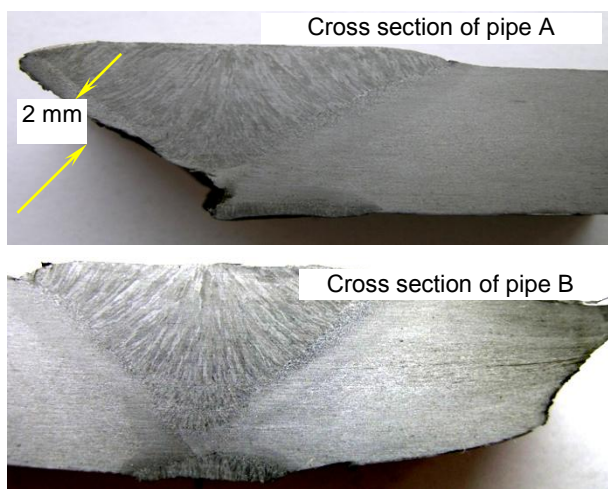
Macrosection of girth weld joint (specimen 9/1)
